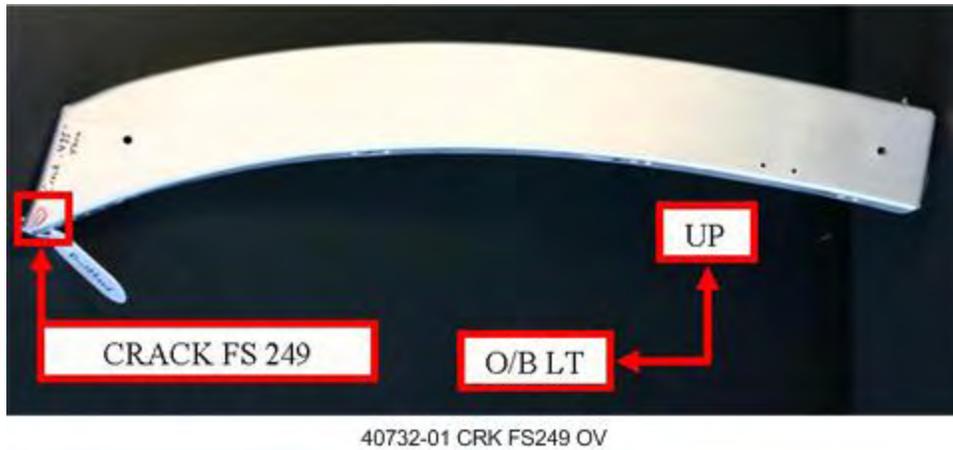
Location of Crack on the Bulkhead Right Aft Fuselage FS 249
